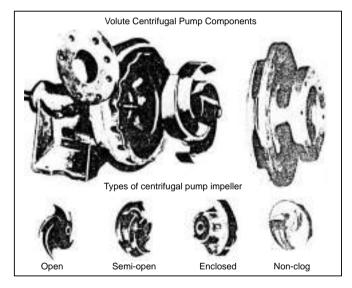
Top: An exploded view of a volute-type horizontal centrifugal pump Bottom: Types of impellers used in centrifugal pumps *Adapted from:* Goulds Pumps Inc. (Olmstead, 1965)
